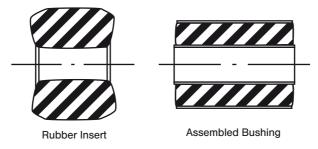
Molded rubber insert (left); assembled bushing showing inner and outer metal sleeves (right)
